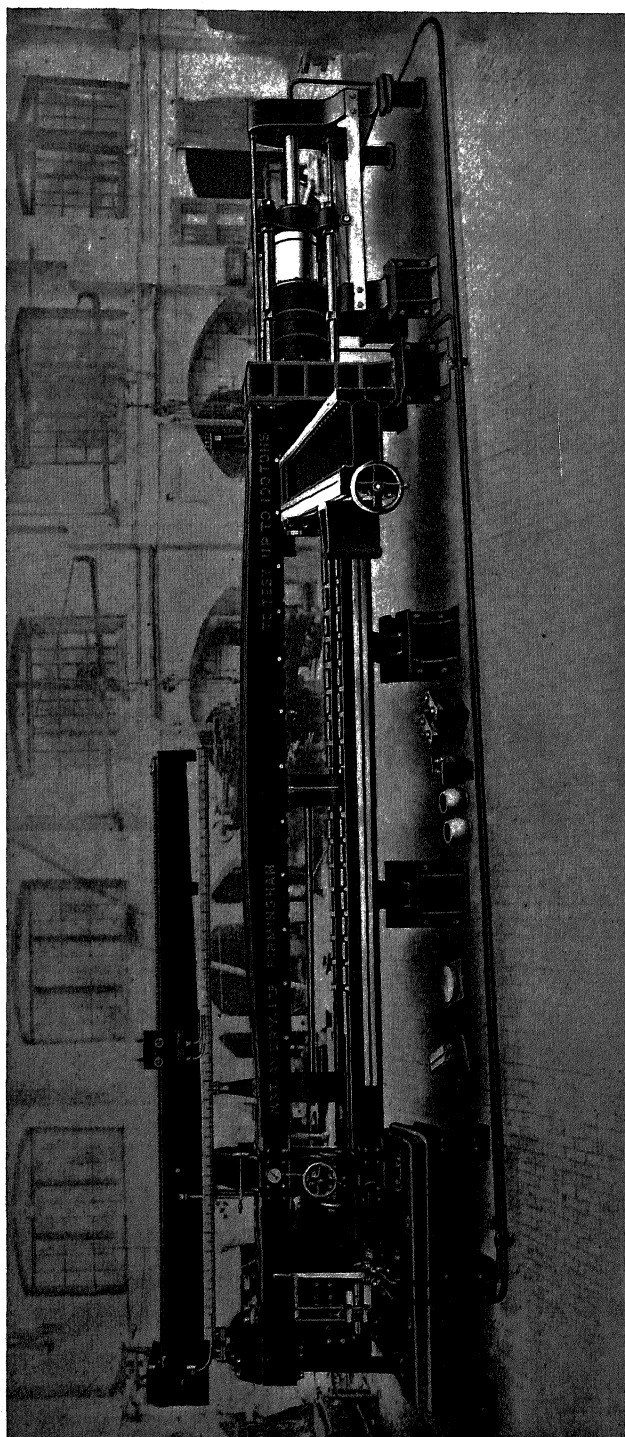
Large Horizontal Tensile Testing Machine (100 tons)
